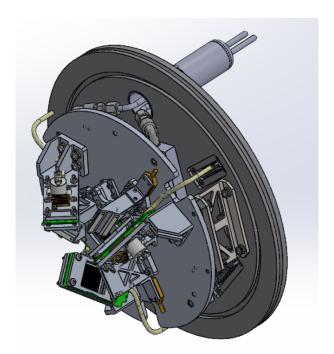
A CAD rendering of the focal plane prototype we will be producing. Our initial prototype will use stand-ins for all electronics and detectors and focus on testing assemble-ability and cooling. In the future we will install the flight detectors as they arrive and can be tested in the beamline.
